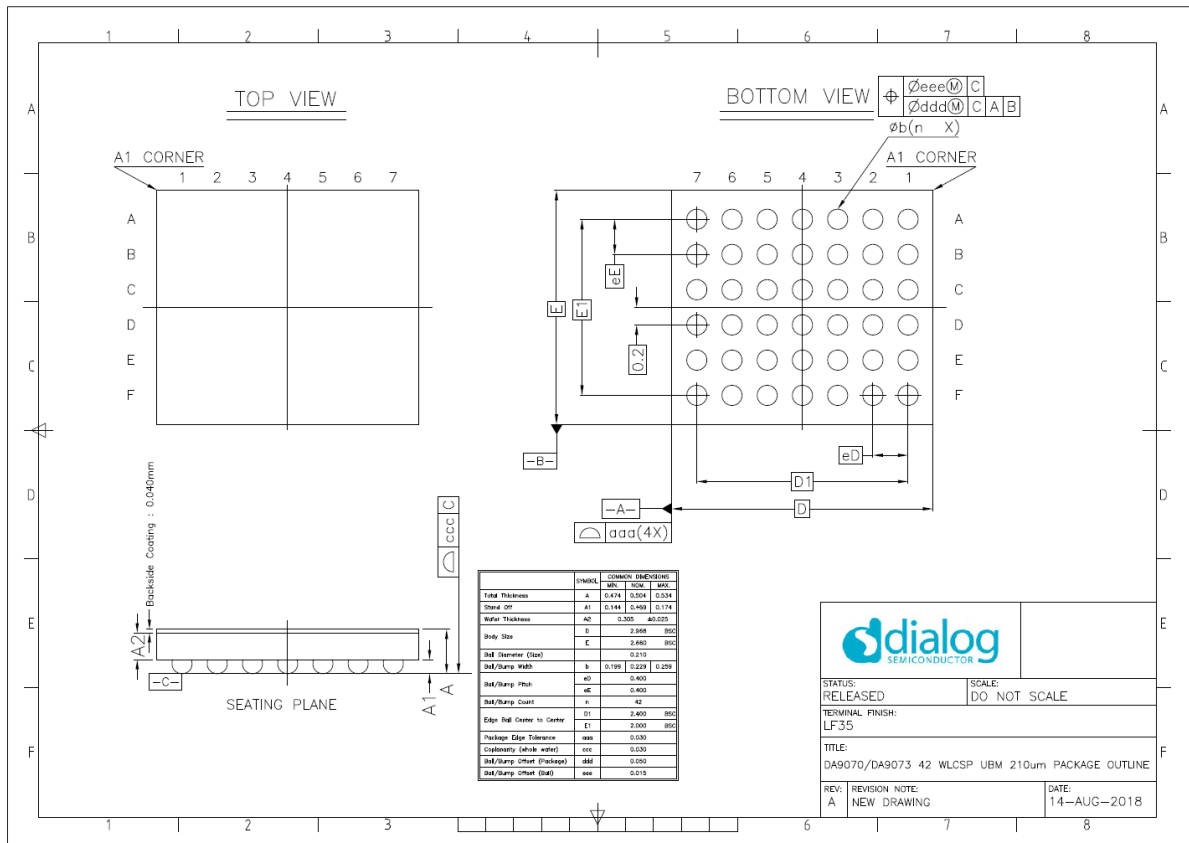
WLCSP-42 Package Outline Drawing, OH version
